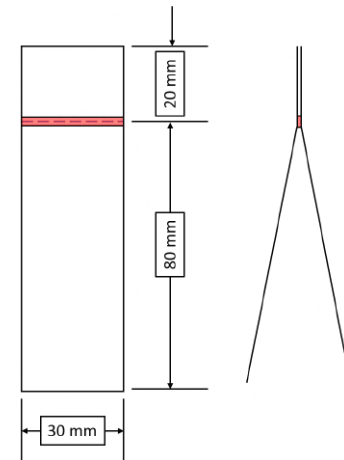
Schematic representation of the dimensions of the test samples for the tensile test.
